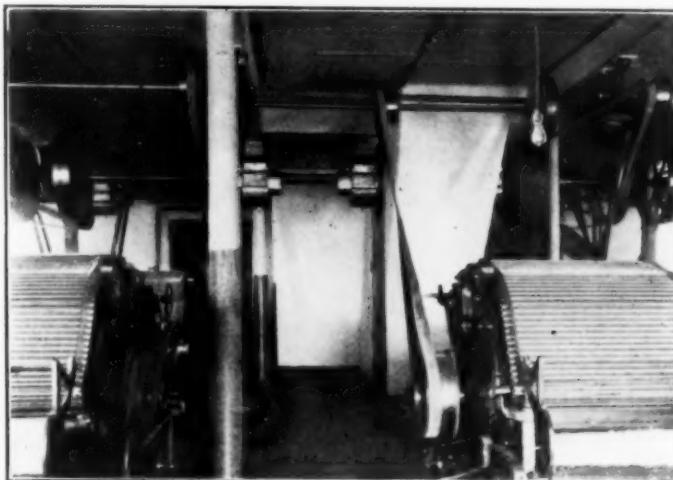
CARD ROOM, THIRD STORY. END VIEW OF BELT ENCLOSURE. BEARINGS ALL OUTSIDE
